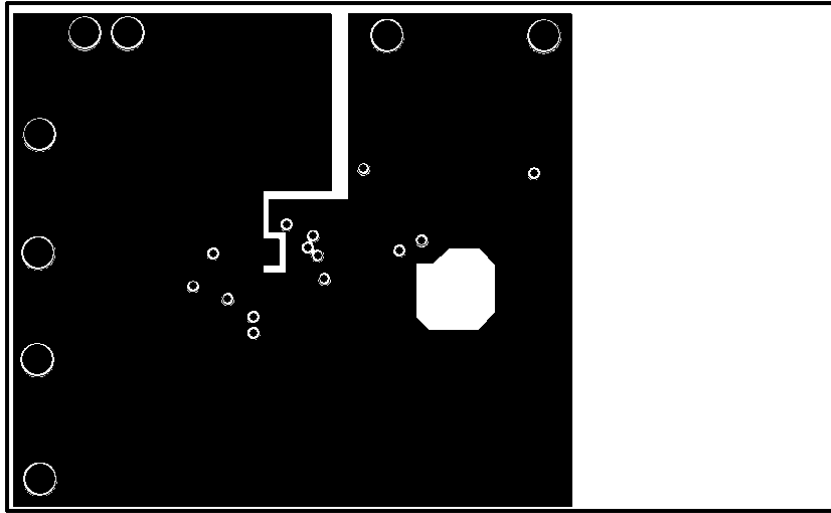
SP6138EB PCB Layout Inner Layer 1 & Inner Layer 2
